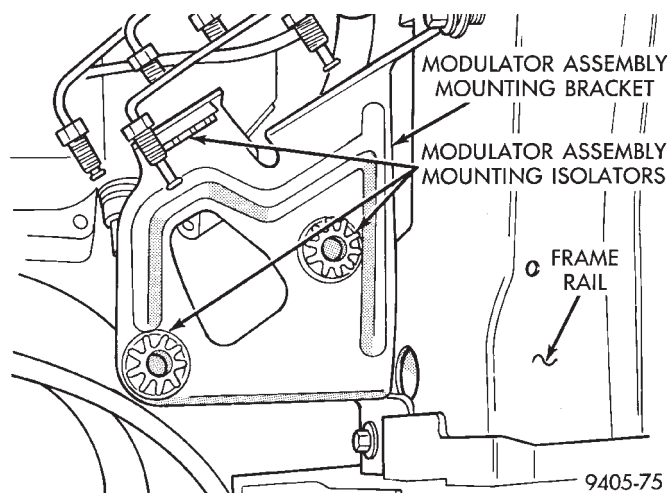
Modulator Assembly To Mounting Bracket Attaching Bolts
